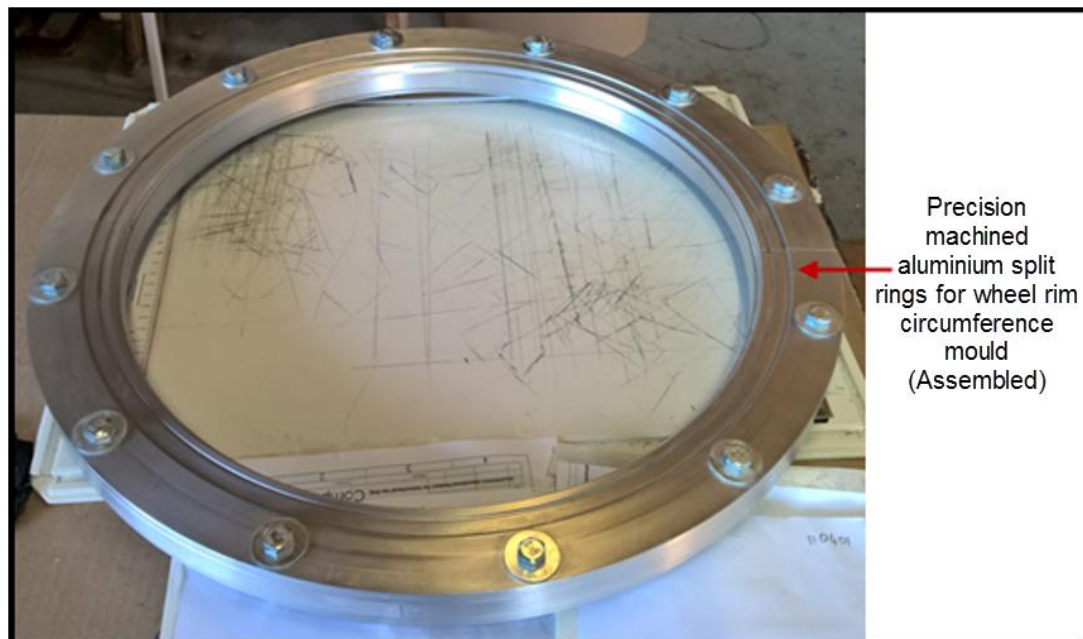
Six precision machined aluminium split rings assembled to form wheel rim circumference mould
